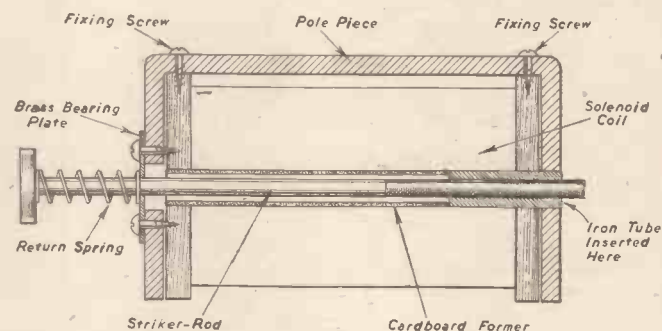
Sectional view of the complete solenoid and striker-rod.
